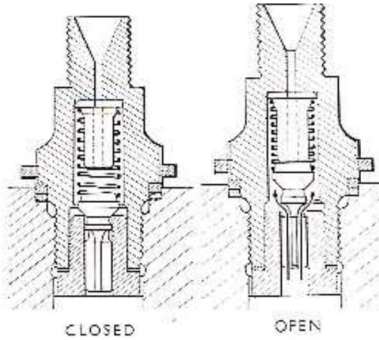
SECTION VIEW OF DELIVERY VALVE
